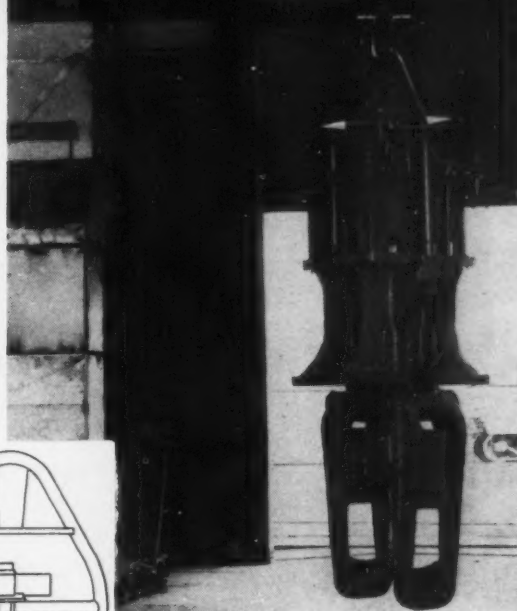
The portable stripper is made by Pittsburgh Engineering & Machine Co. Hung from a crane hook, it can be easily moved and used on any part of the floor over which the crane operates.
